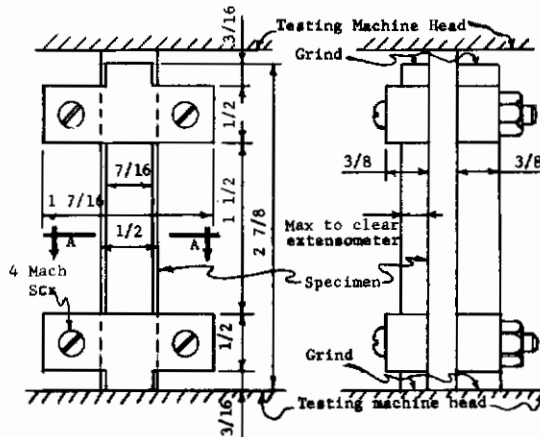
DETAIL OF SUPPORTING JIG FOR THIN SHEET SPECIMENS
